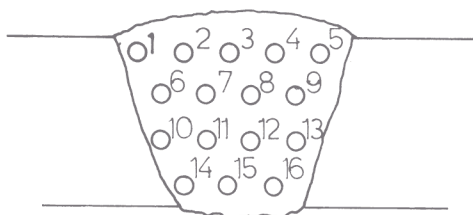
Identification of dilatometer specimens extracted from submerged arc welds.
